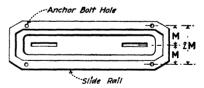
Bottom view of slide rail. Method of obtaining dimension "M" in Fig. 250.
